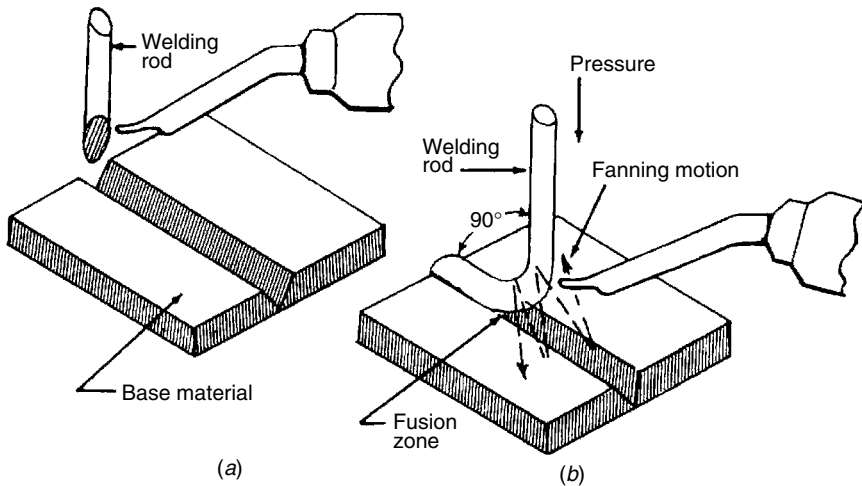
Hot gas welding process. (Courtesy of Laramy Products Co., Inc.)
